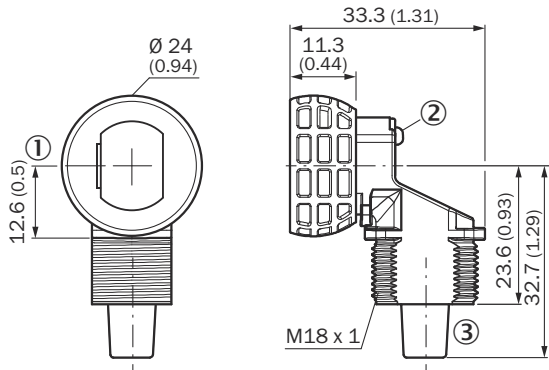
ZSE18-5xxxx / ZSE18-Exxxx, cable
